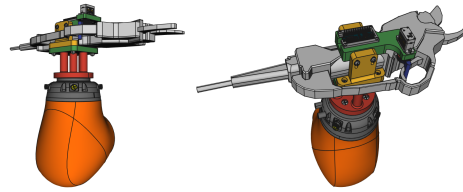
3D CAD model of the tool mounted on the end-effector of the KUKA LBR iiwa7 R800 manipulator.
